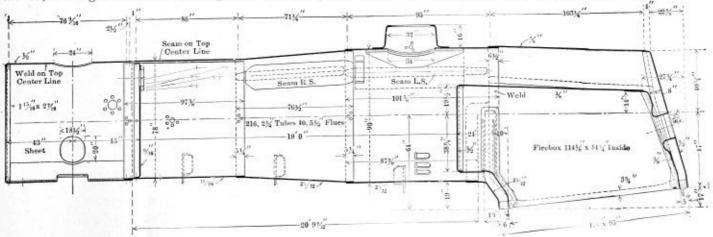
Longitudinal Section Through Boiler of First Standard Government Locomotive
